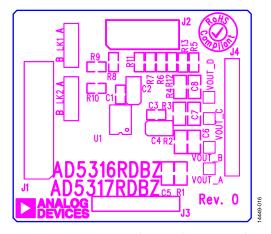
EVAL-AD5317RDBZ Daughter Board Component Placement
